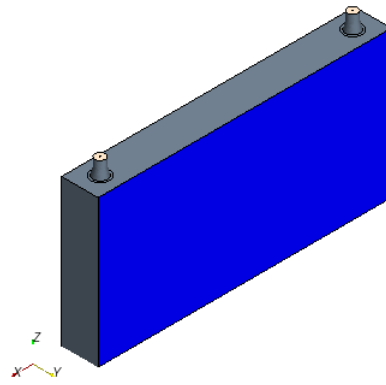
2-sides fire tube geometry with burner, 72x9x36 inches, $d=3.5$ inches
